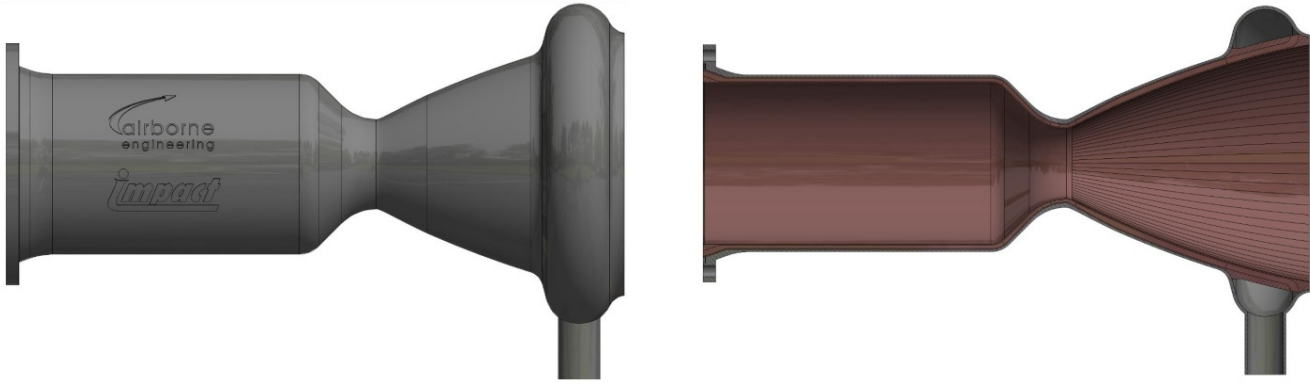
Combustion chamber demonstrator design for cold spray additive manufacture, using CuCrZr for the liner, and IN625 for structural and integral manifold.
